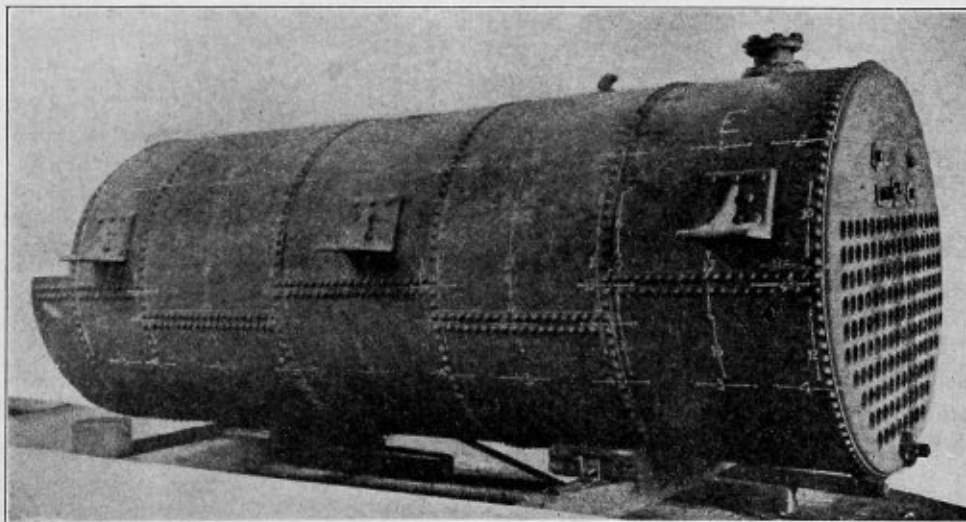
STEAM BOILER NO. 4092, DOME AND MANHOLE FRAME REMOVED PREPARATORY TO TESTING. HEADS STRENGTHENED WITH SIX THROUGH BRACES
